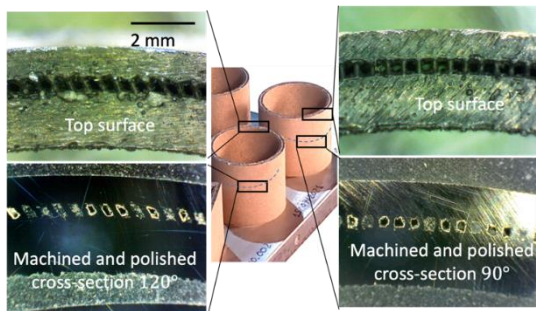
Post milling analysis of the thin-walled parts top surface and sectioned milled surface (100 m/min, 0.025 mm/rev)
